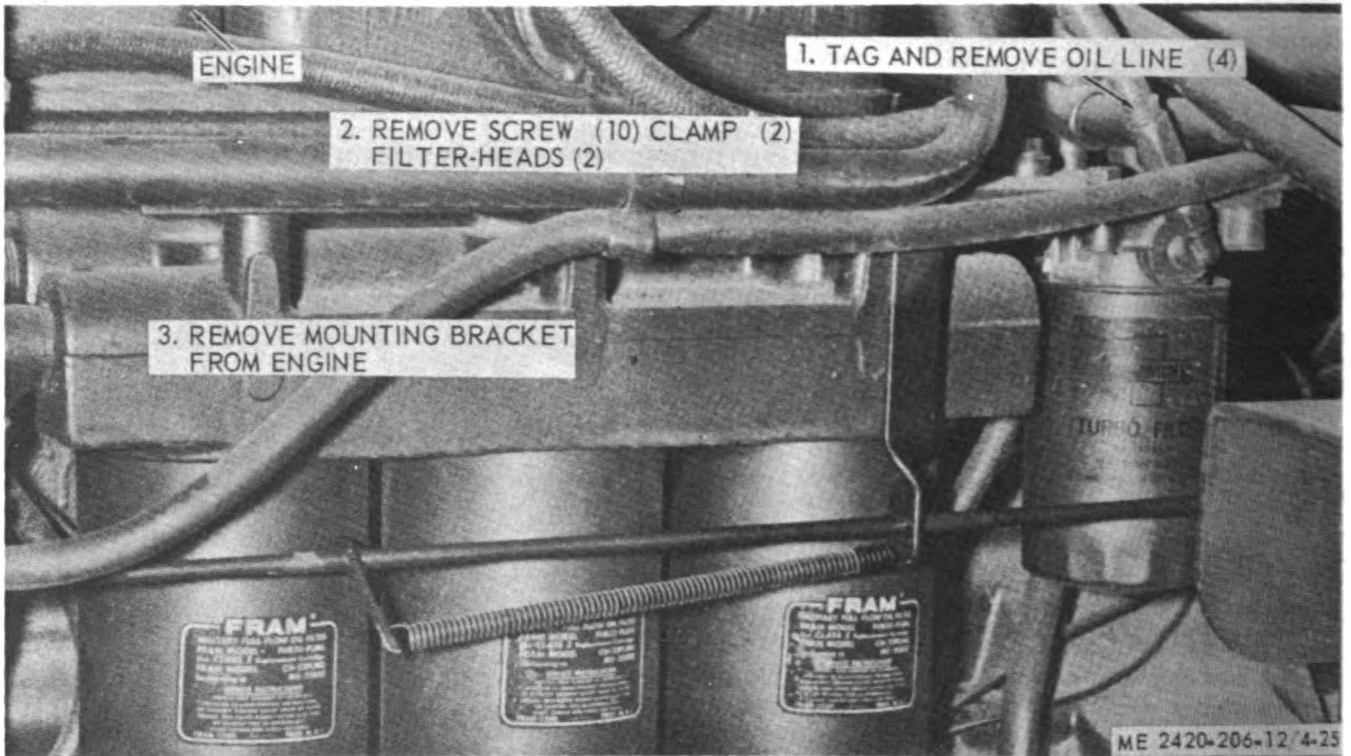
Engine and turbocharger filter head, removal and installation.
